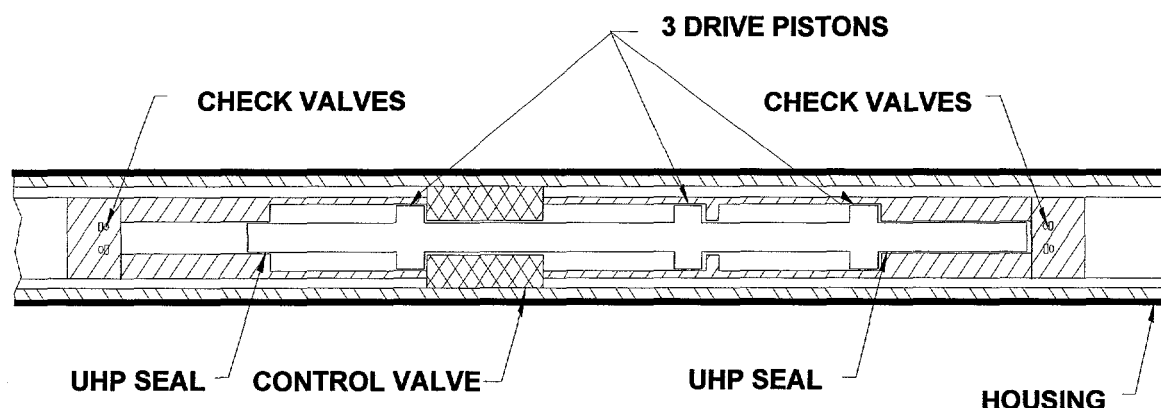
General Arrangement of 6-3/4" Second Prototype DHP.
